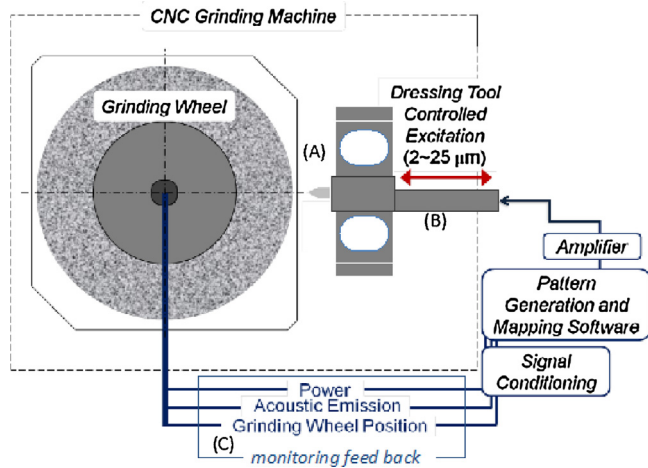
The grinding wheel patterning setup: elastic bearings (A), magnetic displacement actuator (B) and monitoring system (C).
